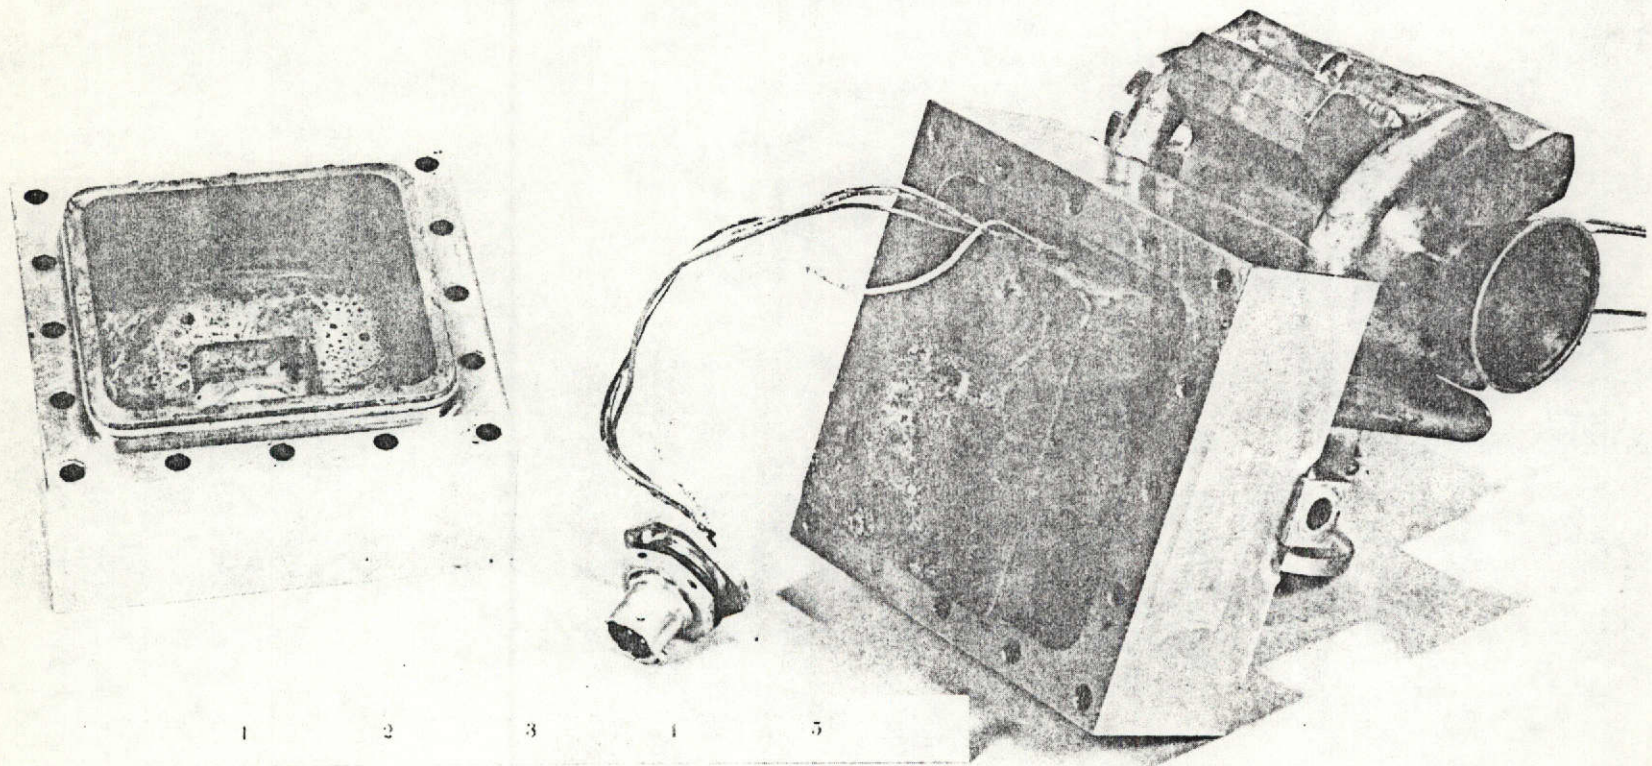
Partial Disassembly of FET After Hot Gas Test #2
